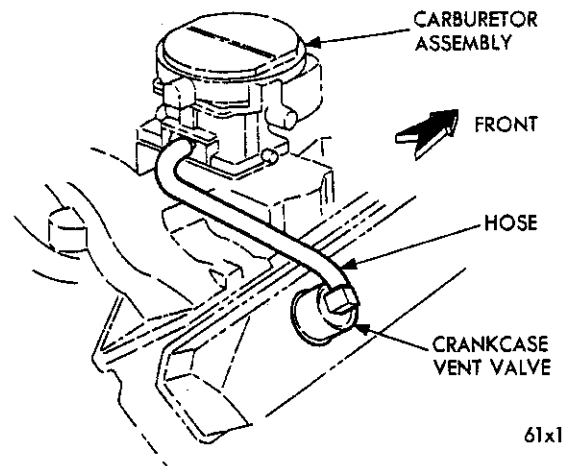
Carburetor Assembly (BBD-3245 Closed Crankcase Vent System)
